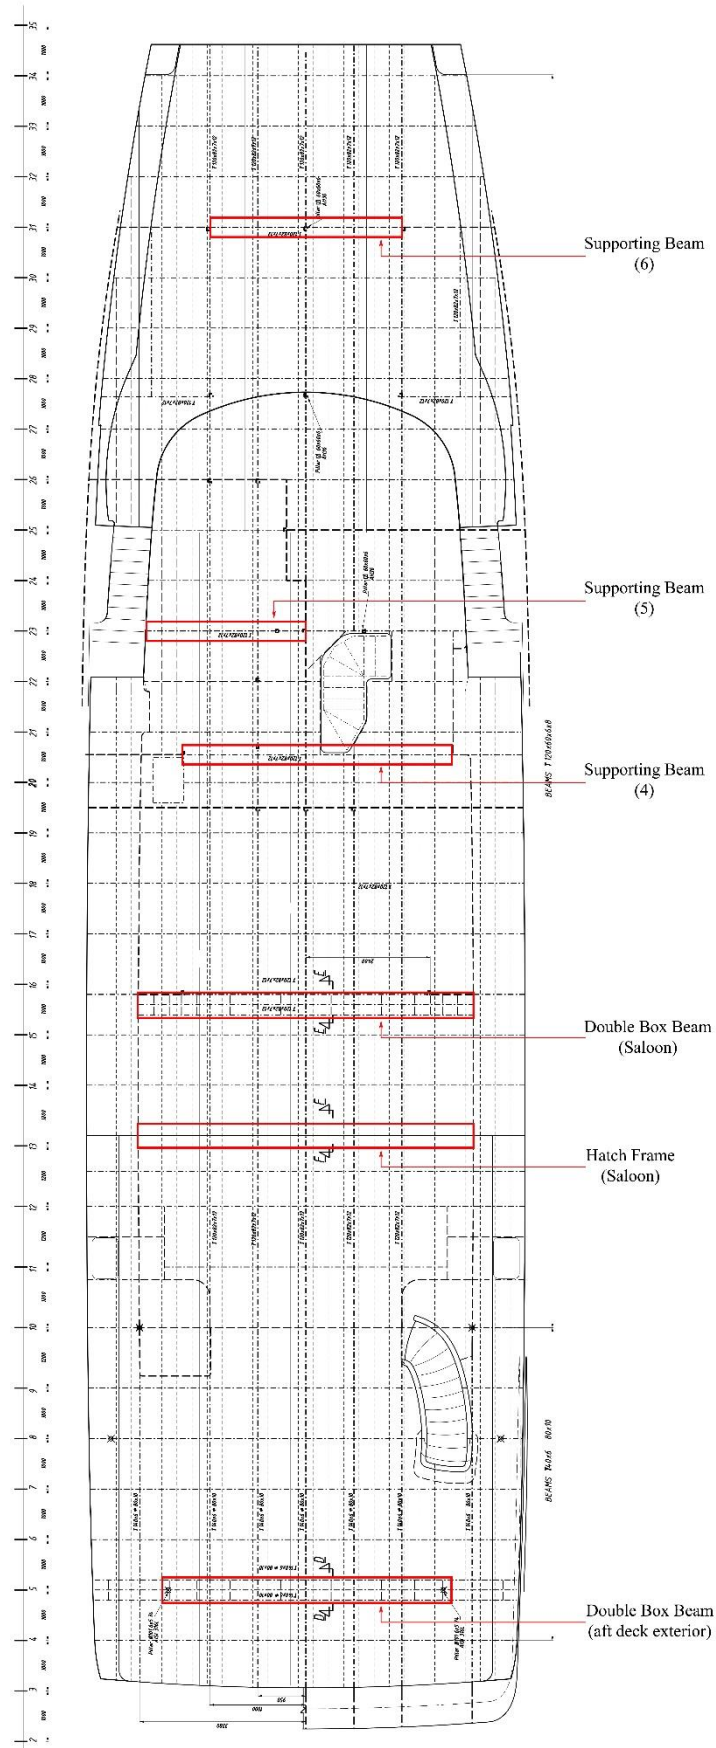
Superstructure Scantling - Plan view (courtesy of Azimut-Benetti spa)
